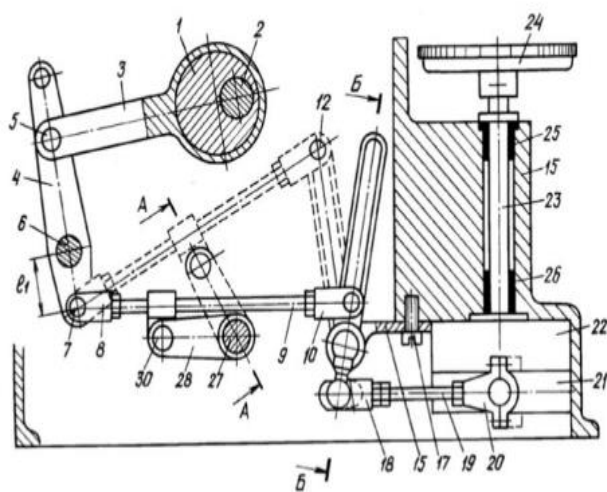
Sewing machine fabric movement with stitch length adjustment
